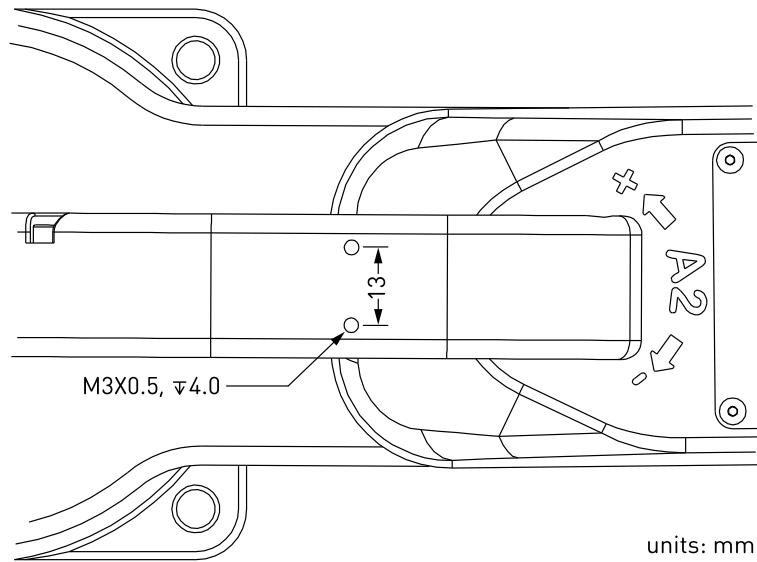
Placement of the threaded holes on the cable conduit of the robot
